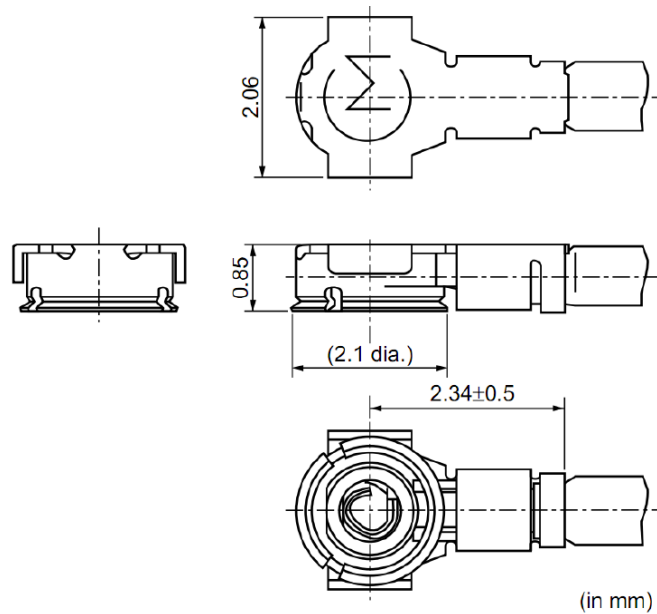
Specifications of Mating Plugs Using $\varnothing 0.81$ mm Coaxial Cables
